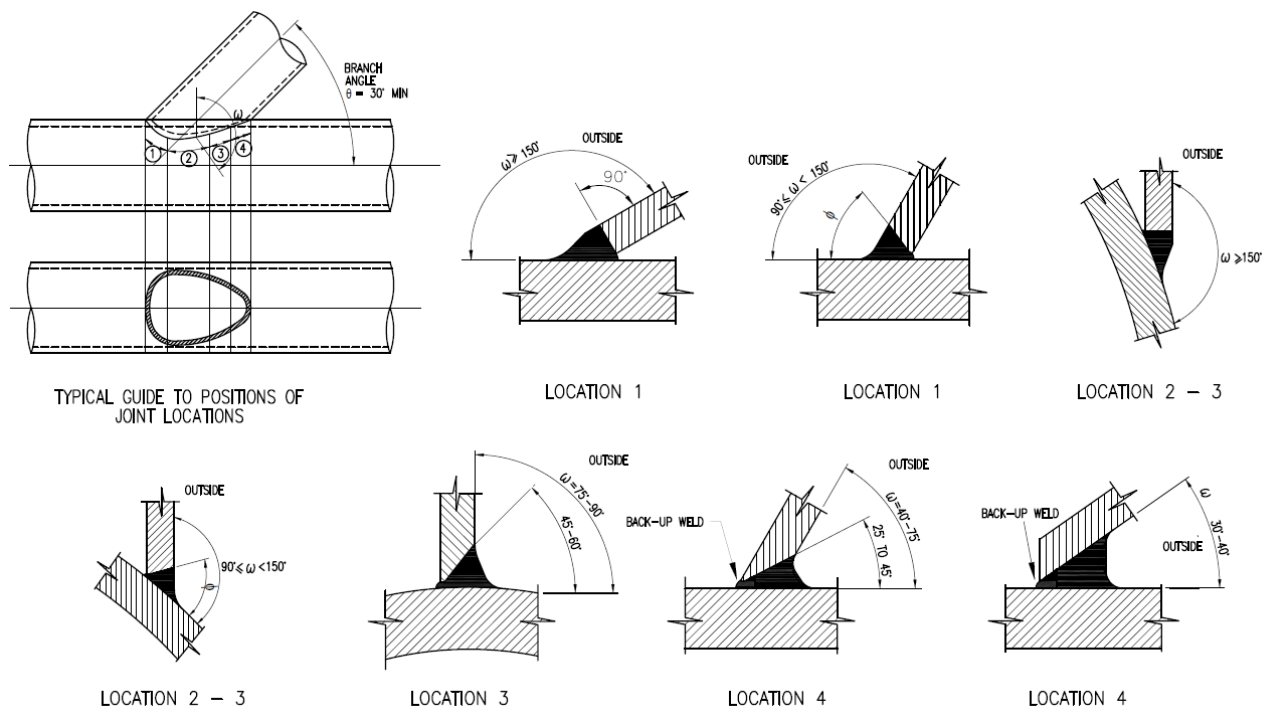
Weld profile of a typical offshore tubular joint.
